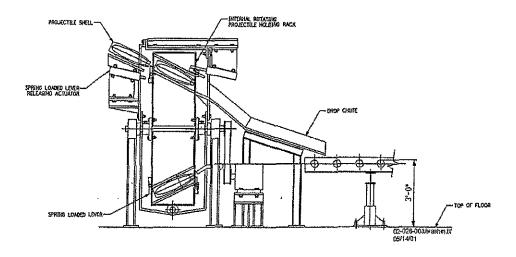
Figure Attachment D-1-5. Projectile (Rotary) Washout Machine
